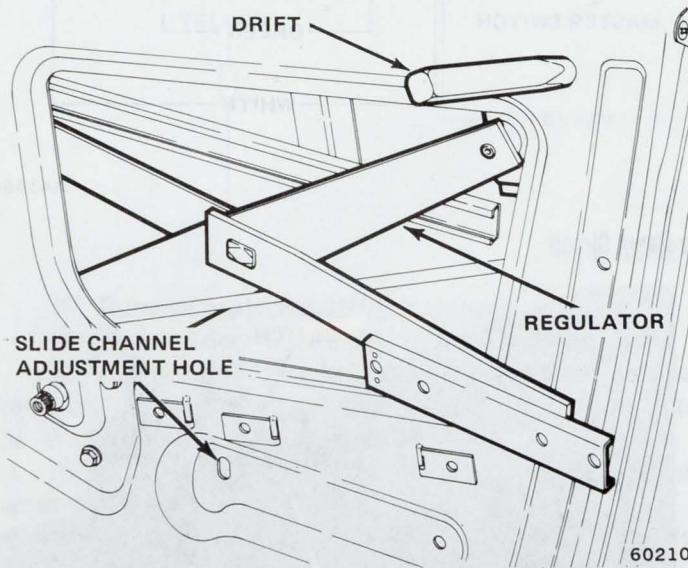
J-76 Rear Door Window Regulator Assembly Removal
